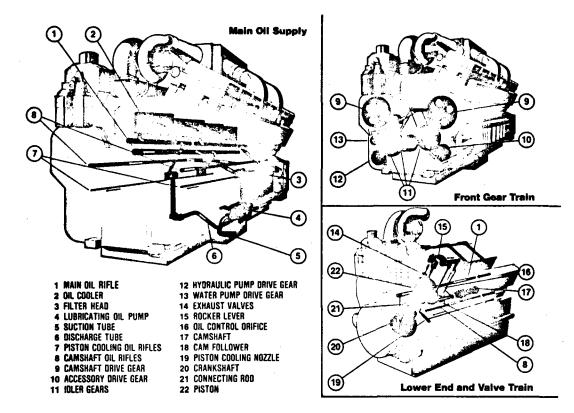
, (LWC-35). Lubricating oil flow schematic -- KTA-3067 Engine
